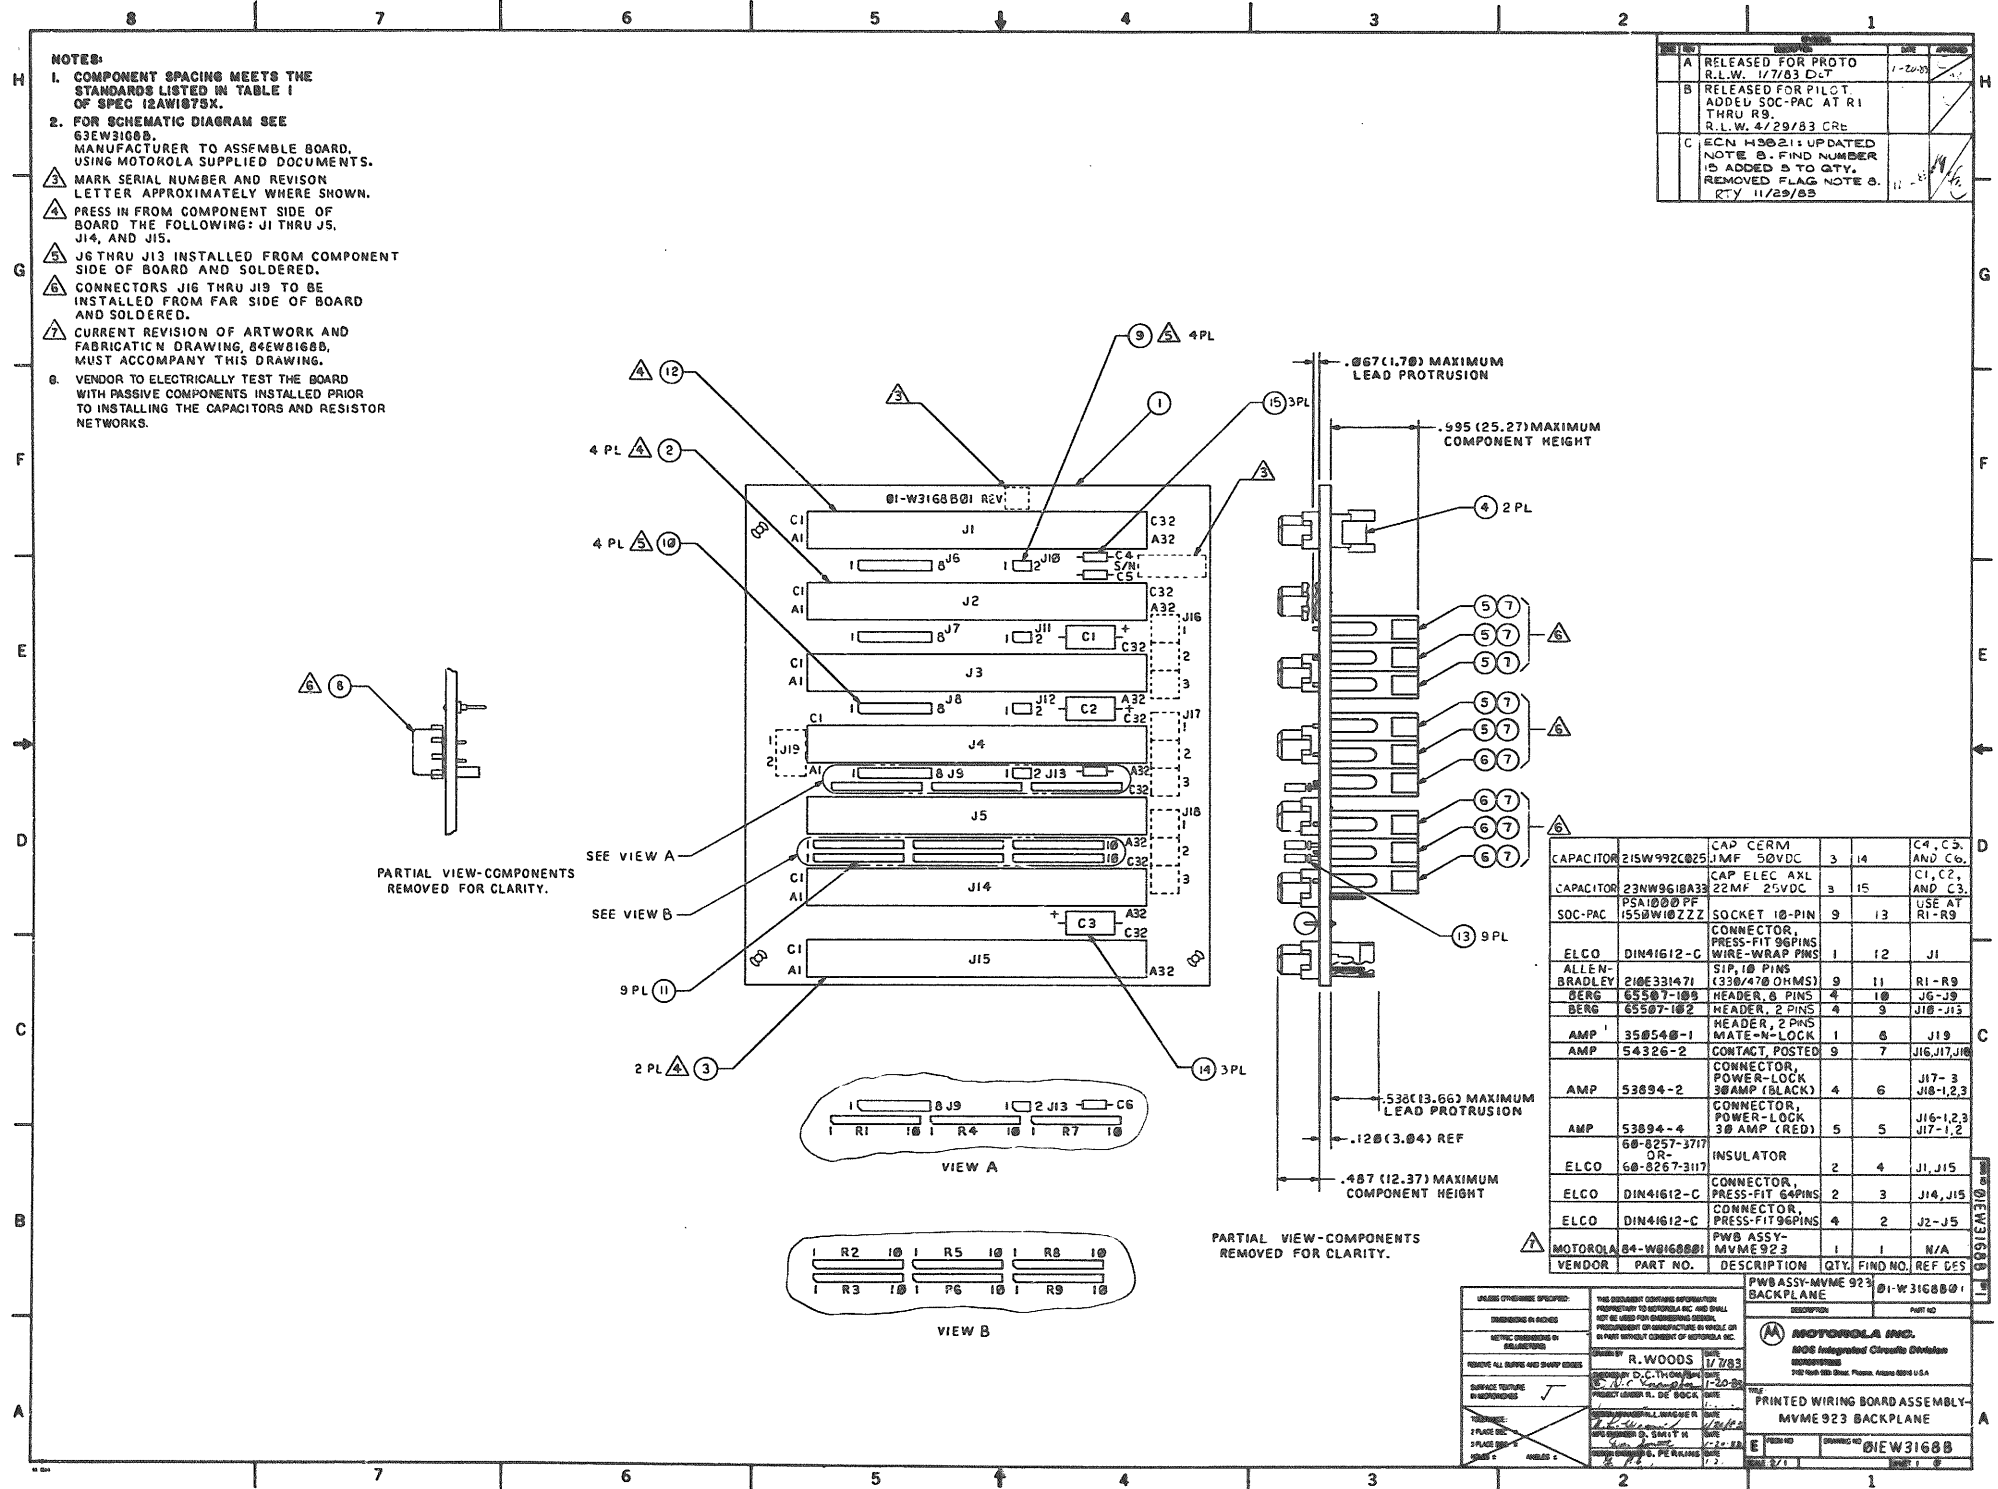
MVME923 Backplane Printed Wiring Board Assembly Diagram
